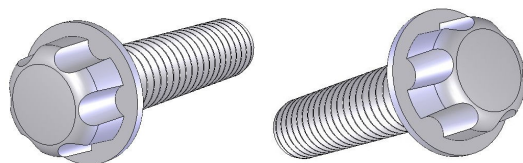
Tamperproof Screw Bolt Used in Sealed Cell Assemblies
